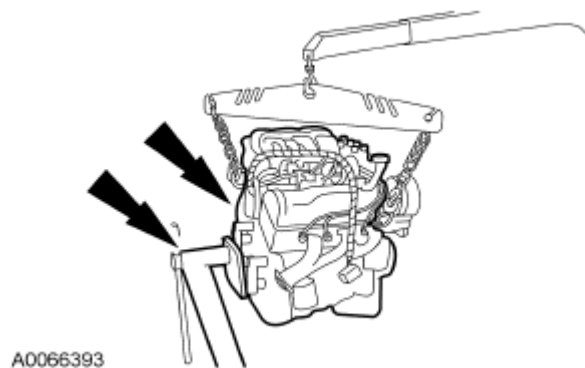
Identifying Special Tool, Floor Crane And Engine
